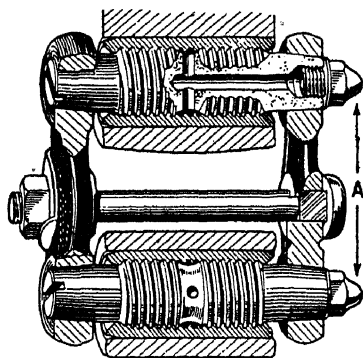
Austin Spring Shackle with Threaded Pins.
